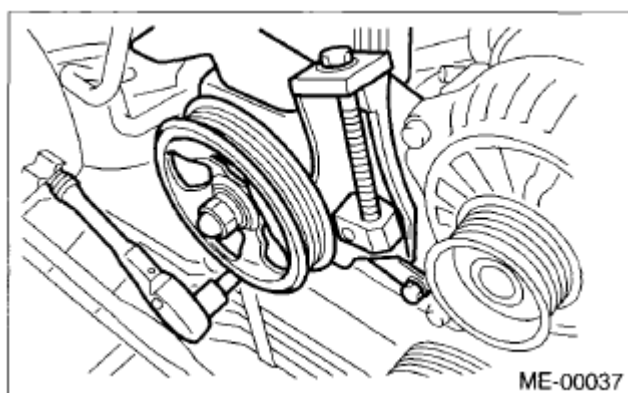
Identifying Power Steering Pump And Bracket With Bolt
